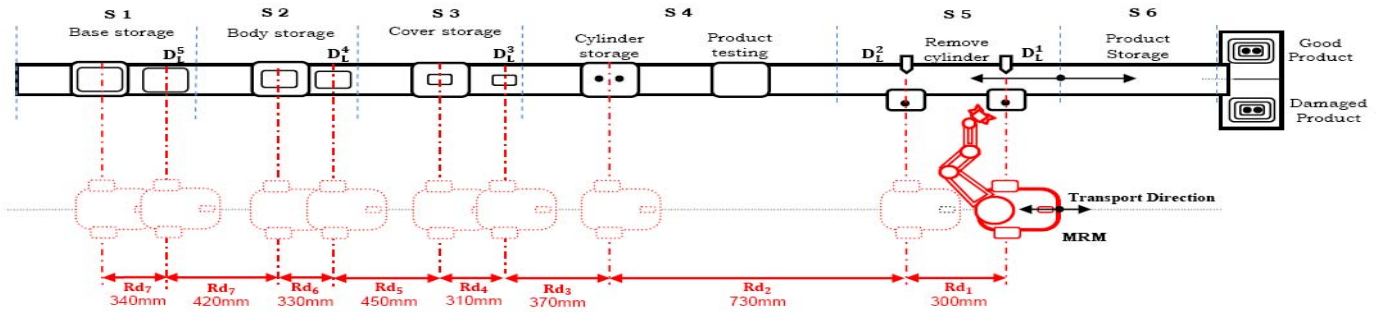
Assembly/disassembly line of a product consists of 5 components, served by the WMR equipped with RM
